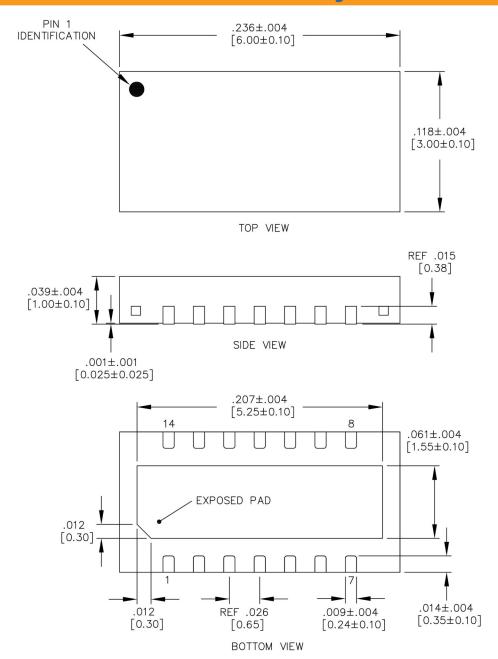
DFN3X6-14 Plastic Package Dimensions (all dimensions in inches [millimeters])
